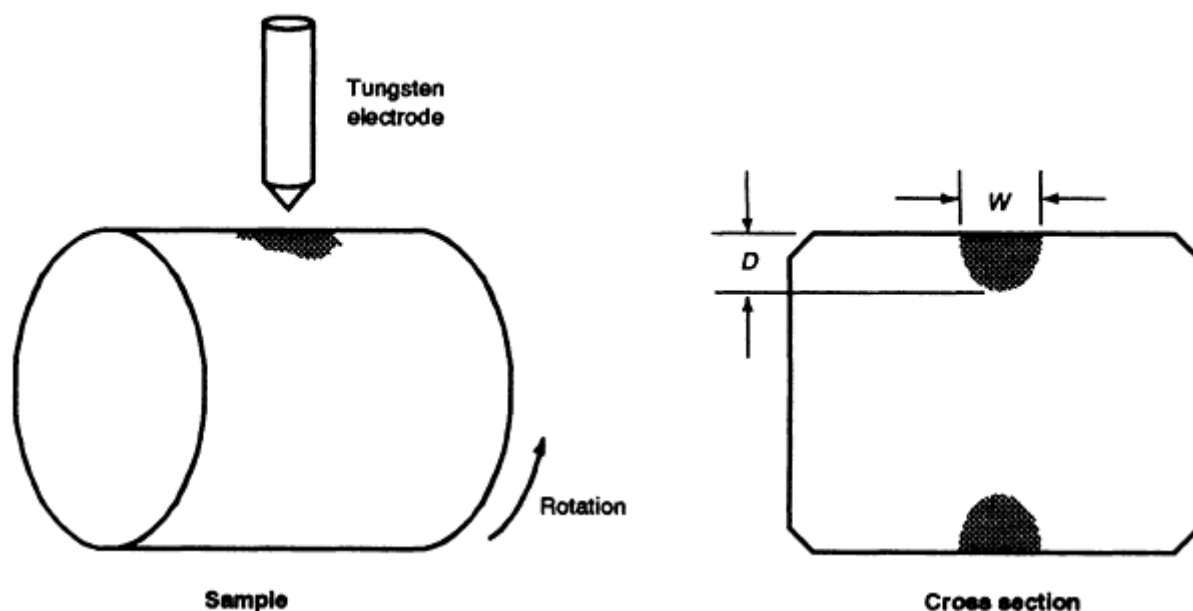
POSITION OF WELD RELATIVE TO SOLID BAR STOCK IN PARTIAL PENETRATION WELD TEST. SOURCE: REF 14
